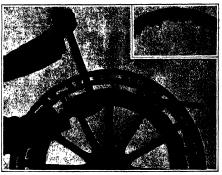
Method of introducing the rim cups. The insert shows a part of the tread band with the bearing cups.
